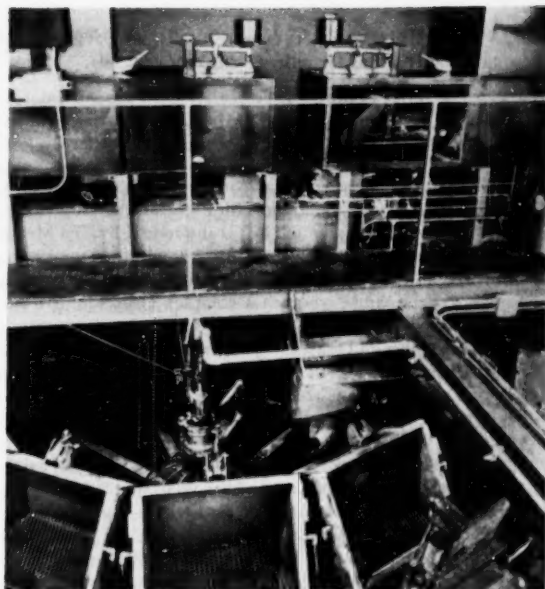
AUTOMATIC PROPORTIONING AND BLENDING EQUIPMENT AT THE TOP OF 12-STATION SHELL-MOLDING MACHINE
